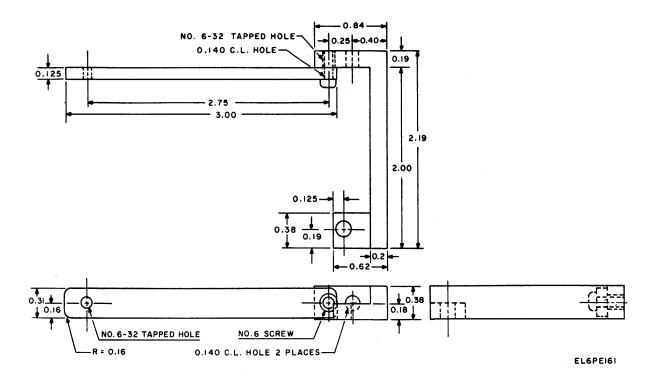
Alarm Monitor Power Supply Support Fixtures Fabrication Details (Sheet 1 of 2).
